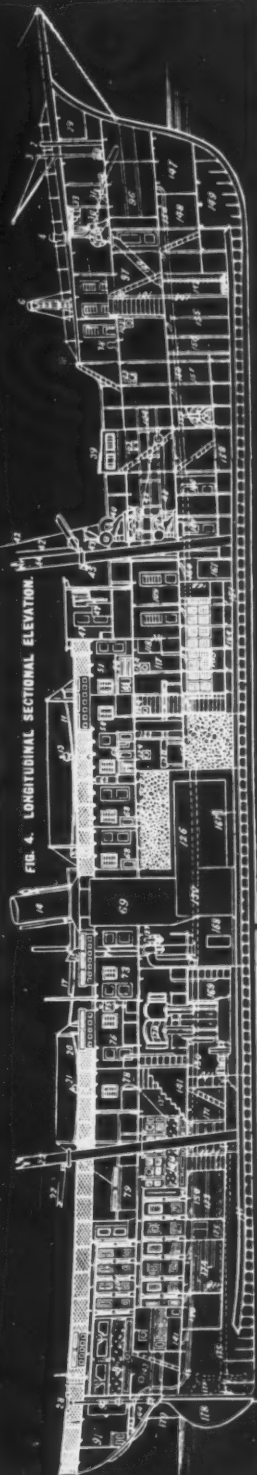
LONGITUDINAL SECTIONAL ELEVATION.
